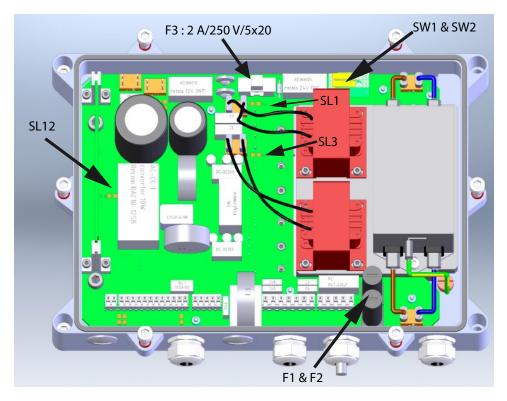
Location of fuses F1, F2, F3; SolderLink SL12 & Contacts SW1, SW2 on the DES 411 circuit
